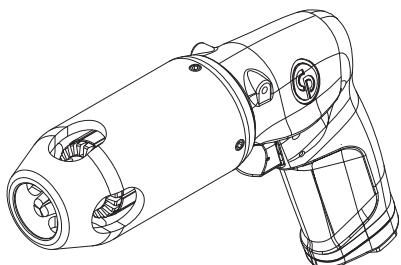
CP1117P26 & CP1117P32 : DIMENSIONS WITHOUT COVER & WITHOUT CHUCK
